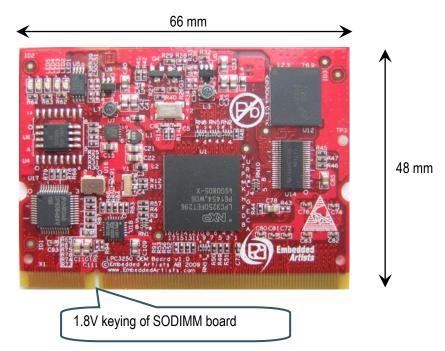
LPC3152 OEM Board Mechanical Dimensions
